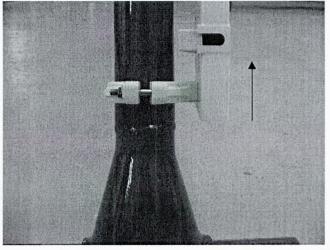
Basket Adjustment Step 2 – Forward Fitting Aligned (Aft beam moved up to align forward fitting with keyway)
